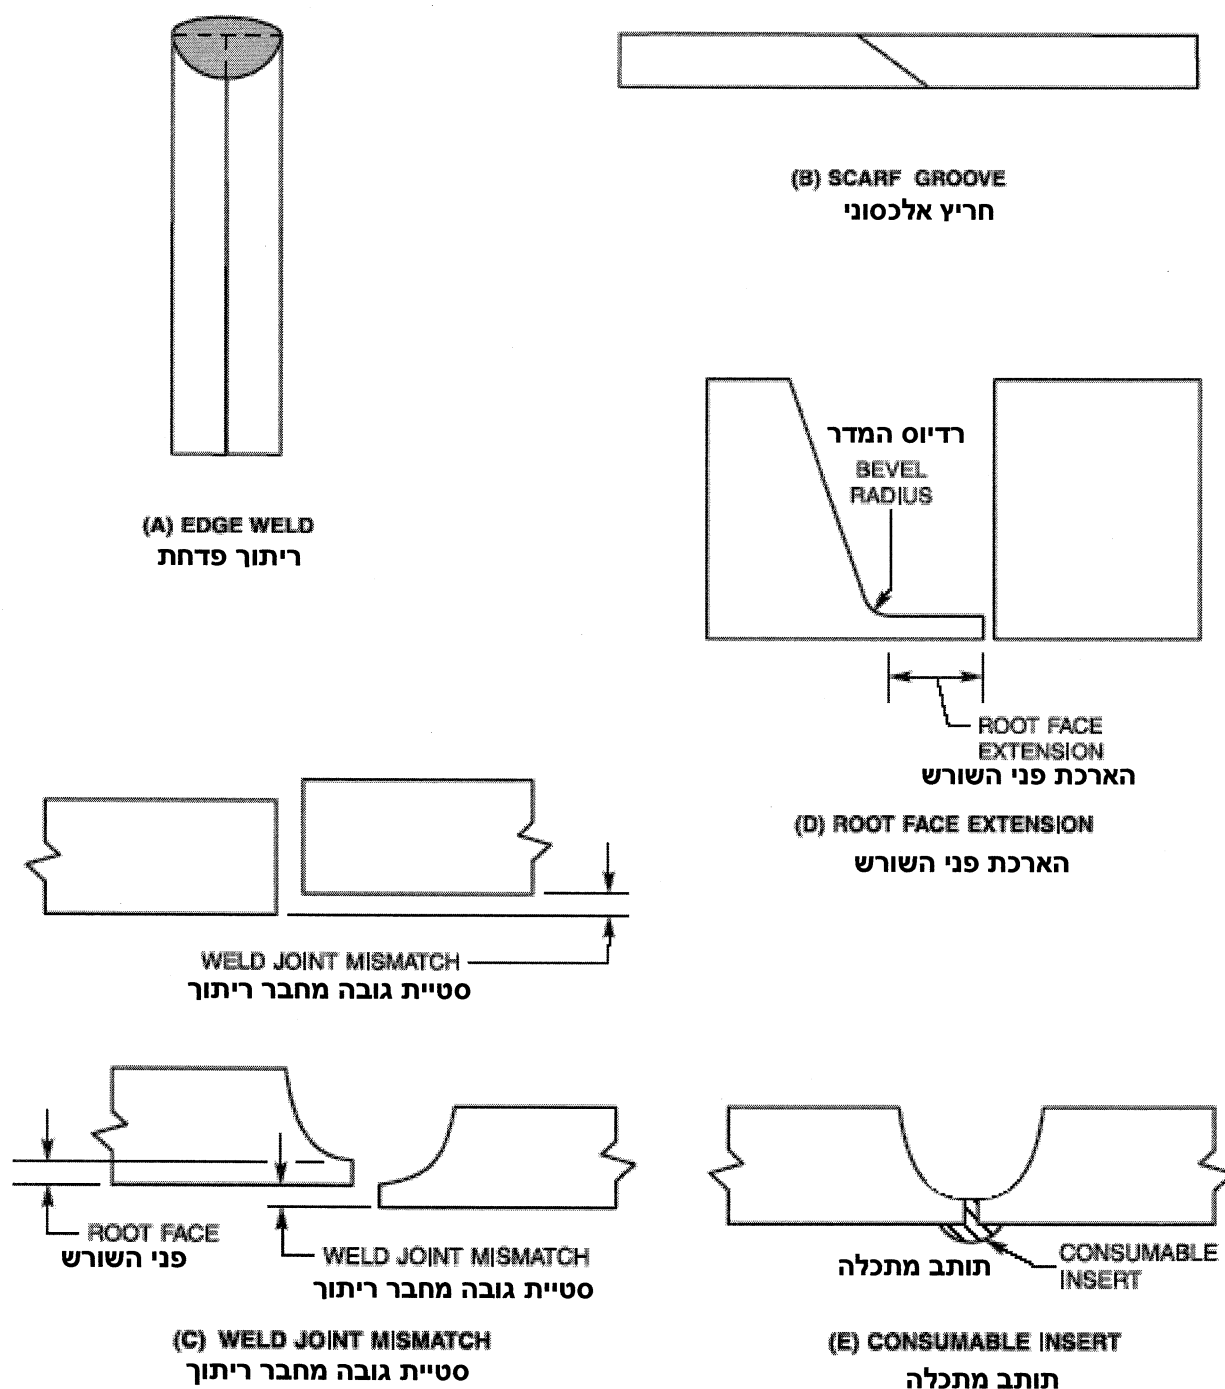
Edge Weld, Scarf Groove, Weld Joint Mismatch, Root Face Extension, and Consumable Insert
